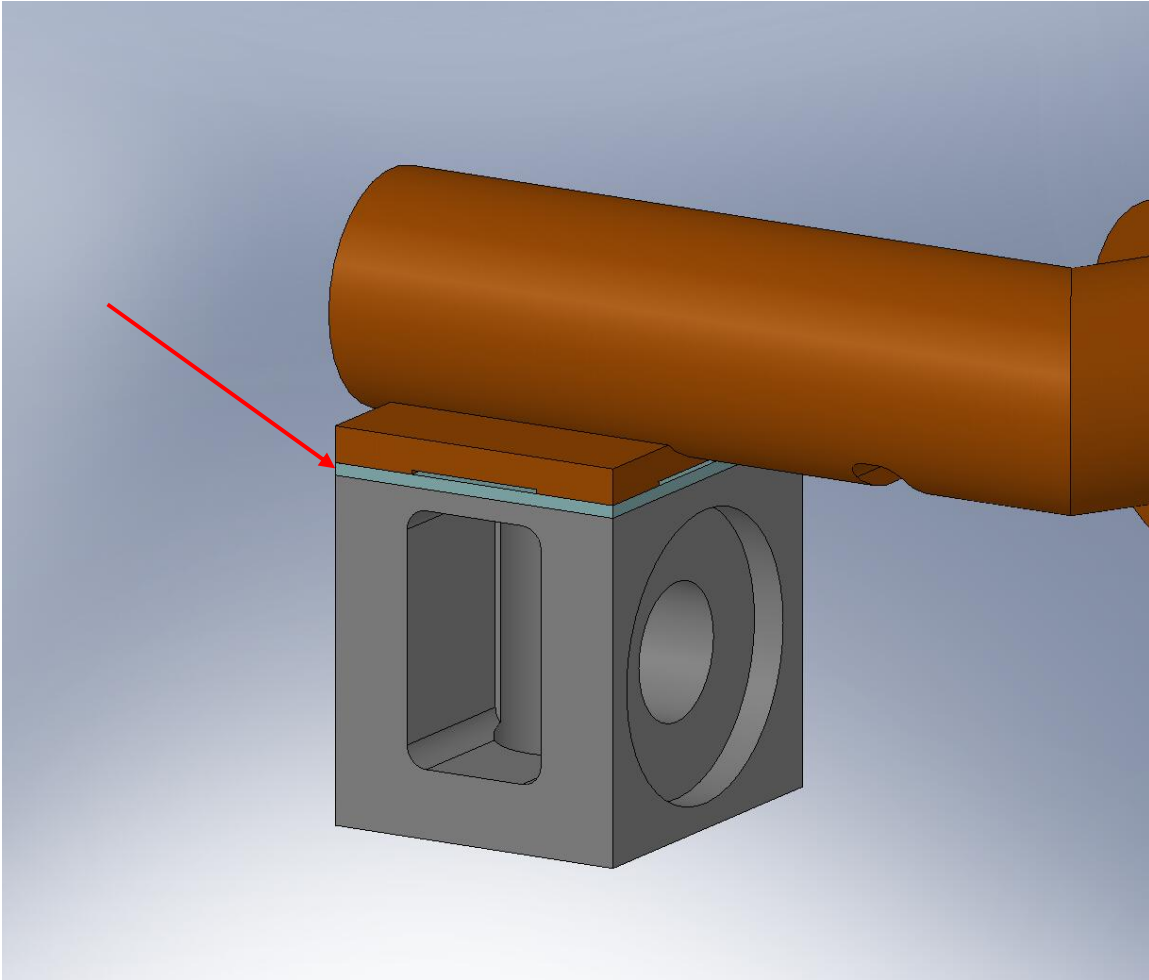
The blue plate represents an adapter from one bolt pattern to another. It would likely need to be thicker than is shown here, to allow enough thread engagement for the Connector Tube's mounting bolts. It is possible that this component would not be needed at all, if the desired bolt pattern could be machined directly into the Boot.
